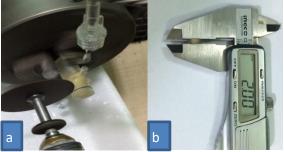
a. Sectioning of the specimen, b. the specimen measured with digital caliper
